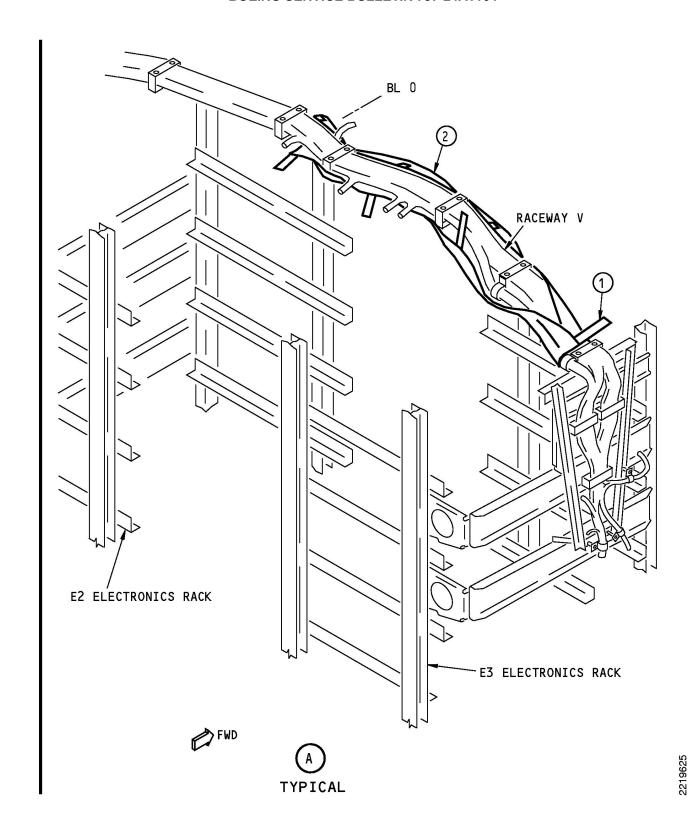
RACEWAY WIRE BUNDLES - FIRE PROTECTION BLANKET - REMOVAL (SHEET 2 OF 3)
